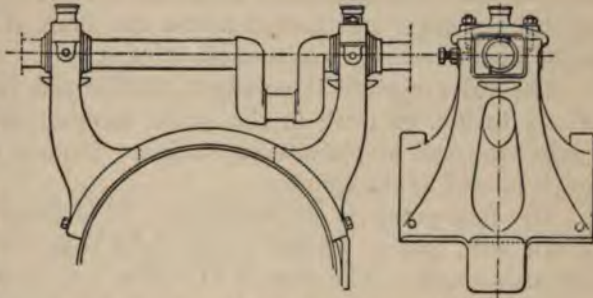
Portable Engine: Crank-shaft. Scale 1/10th.
